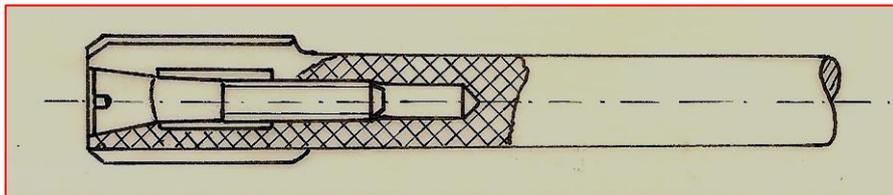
Expandable reamer for blind holes (usable on machine tools)
